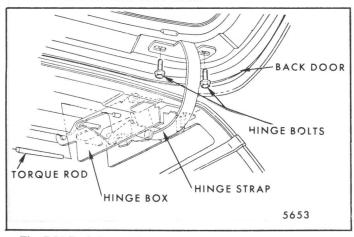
Back Door Hinge Attachment - "H-15" Styles
